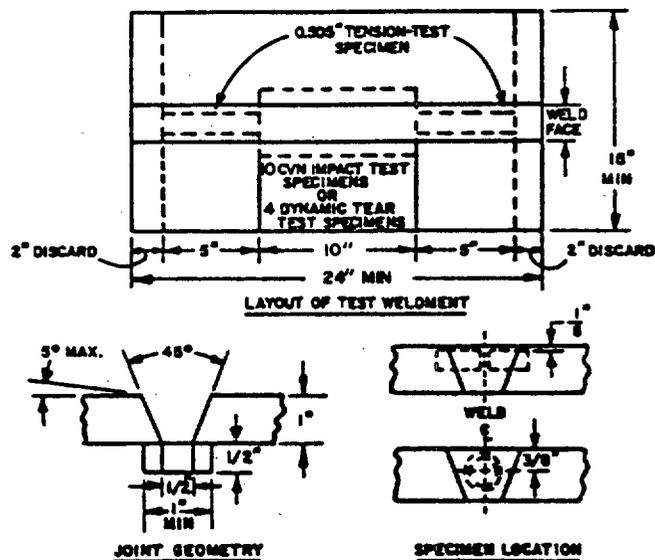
Weld joint for soundness and for mechanical tests for types MIL-80S-1, MIL-80S-2, and MIL-80S-3, MIL-80S-1F, and MIL-80S-2F.
